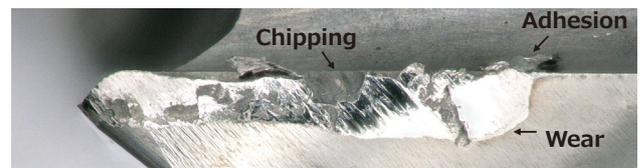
Typical tool damage in high-efficiency machining of difficult-to-cut materials
